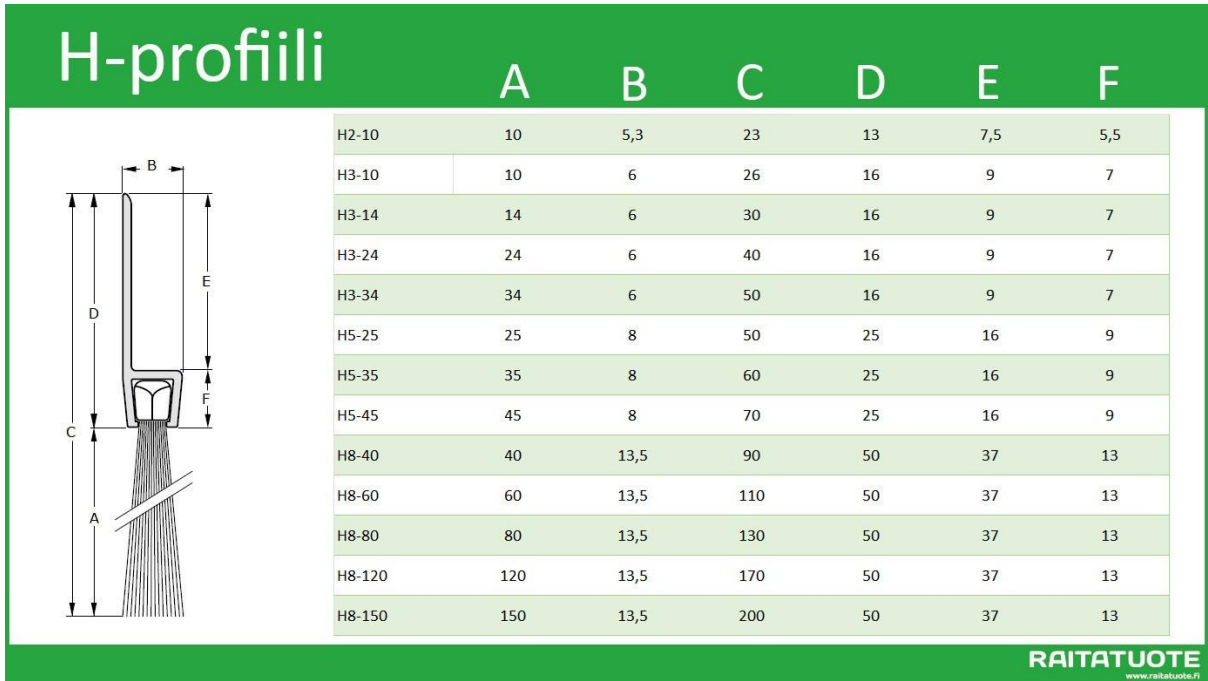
Product dimensions for Stribo Pro H8/120 from Raitatuote (2025).
